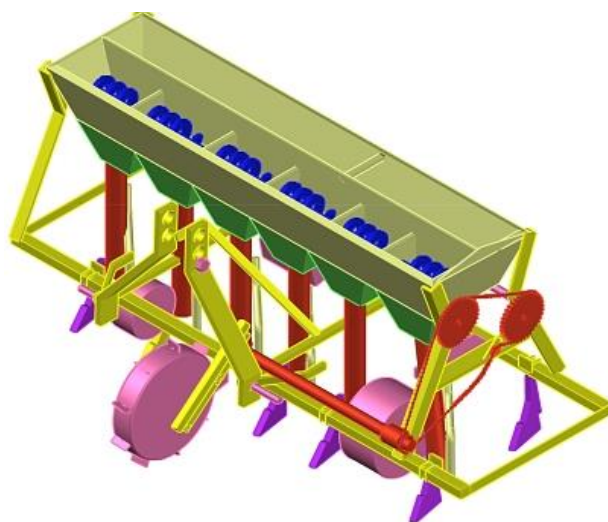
Isometric view of developed prototype subsurface manure and seed applicator
